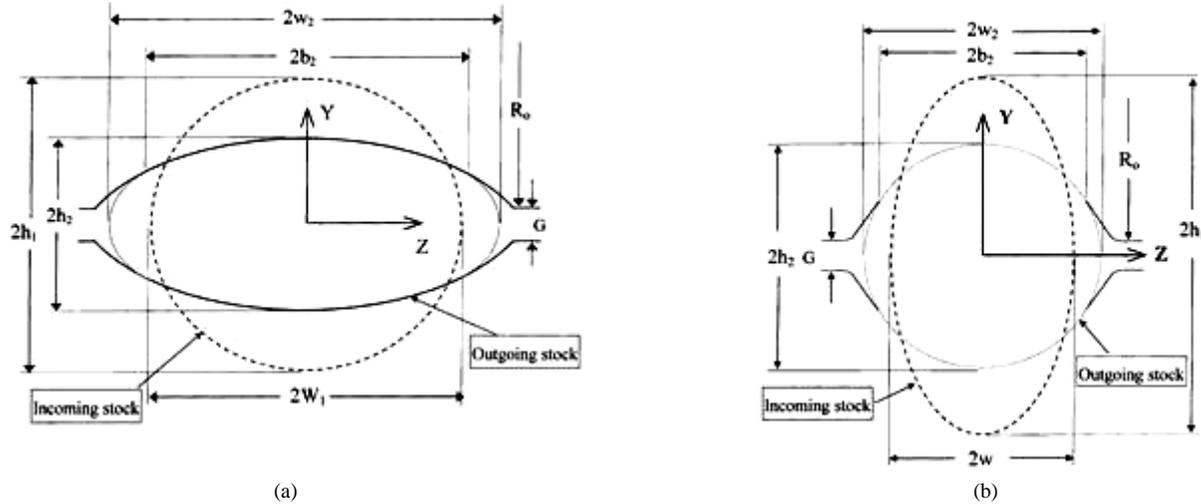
Workpiece profile geometry (a) oval pass, (b) round pass
